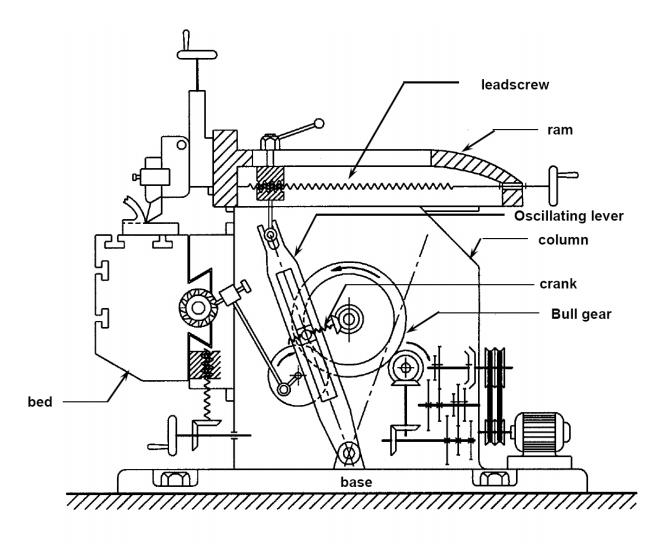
Kinematic diagram of a shaping machine.
